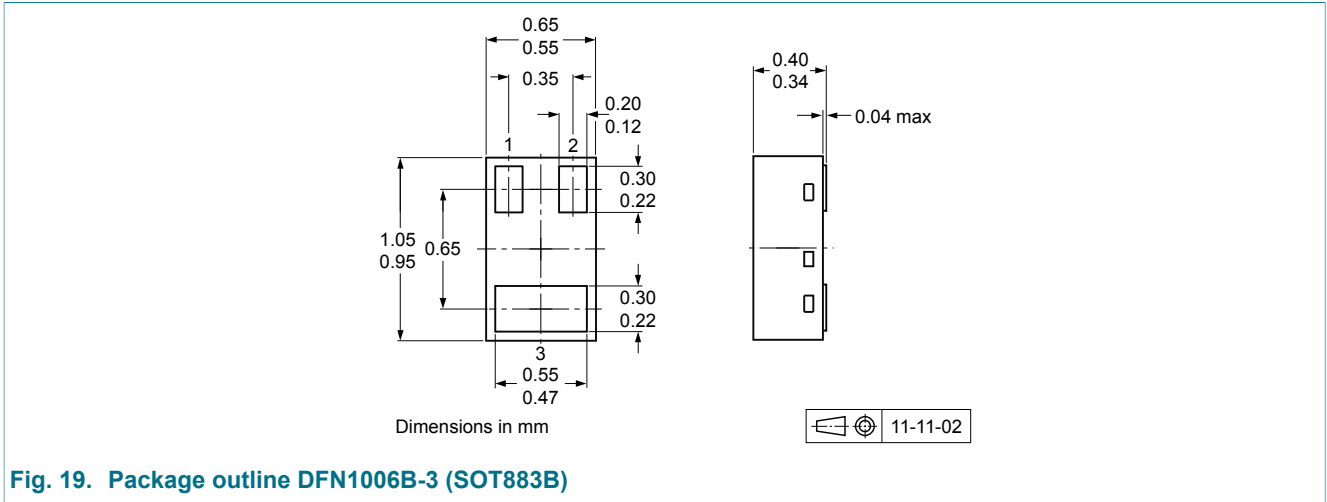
Package outline DFN1006B-3 (SOT883B)
